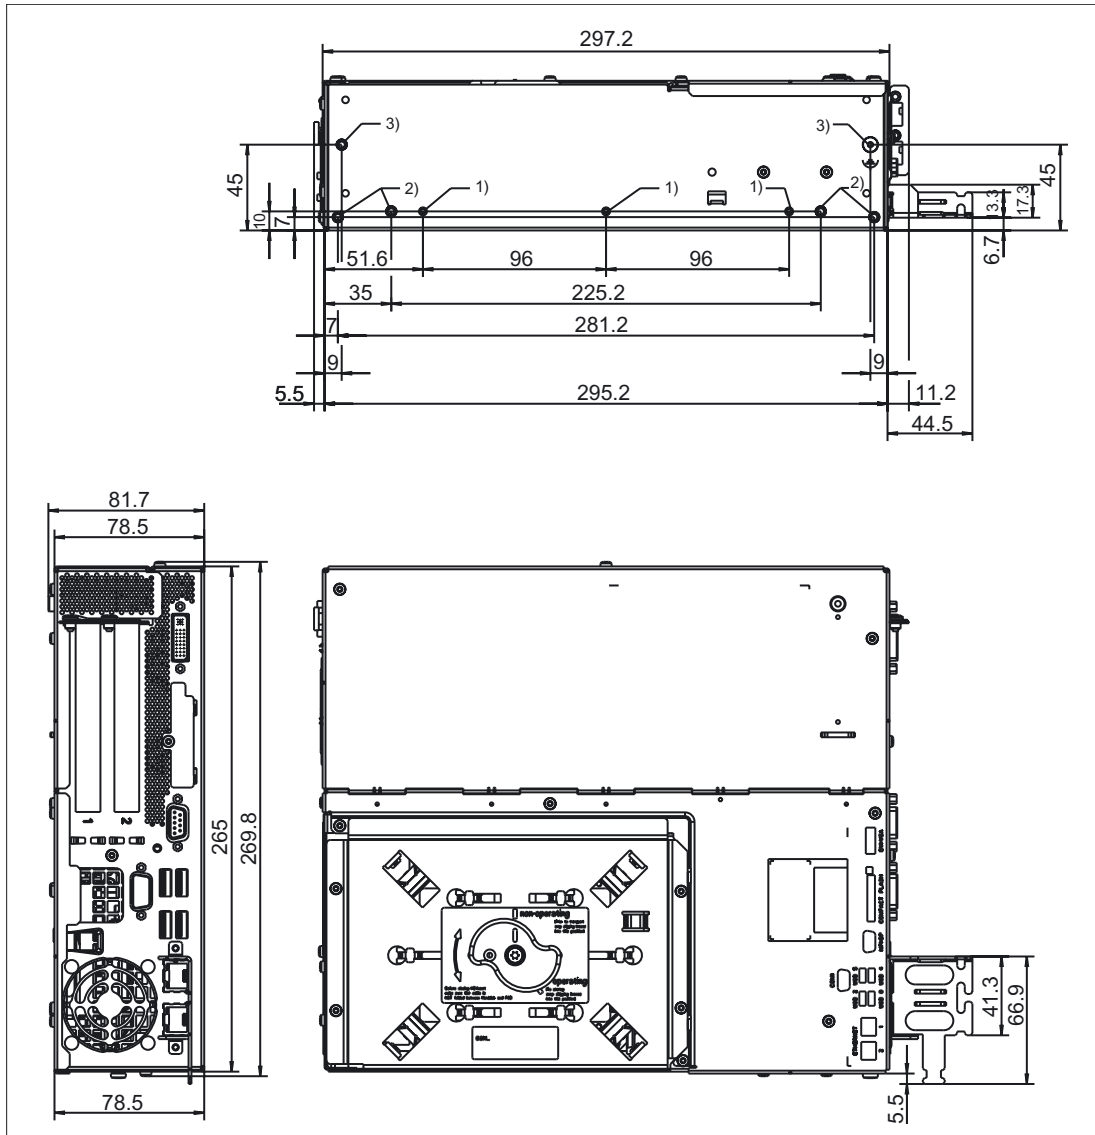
PCU 50.3 dimension drawing for mounting with ETH strain relief
